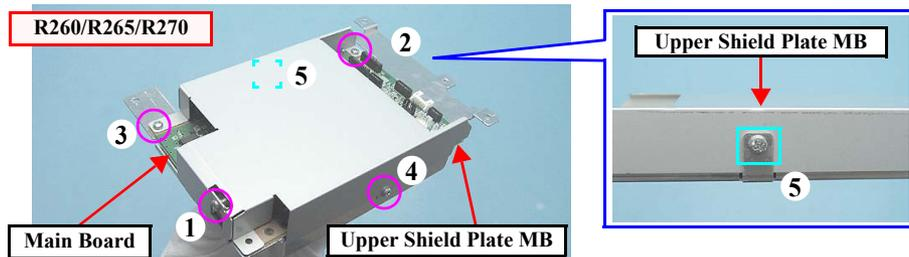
Removing the Upper Shield Plate MB (R260/R265/R270)
